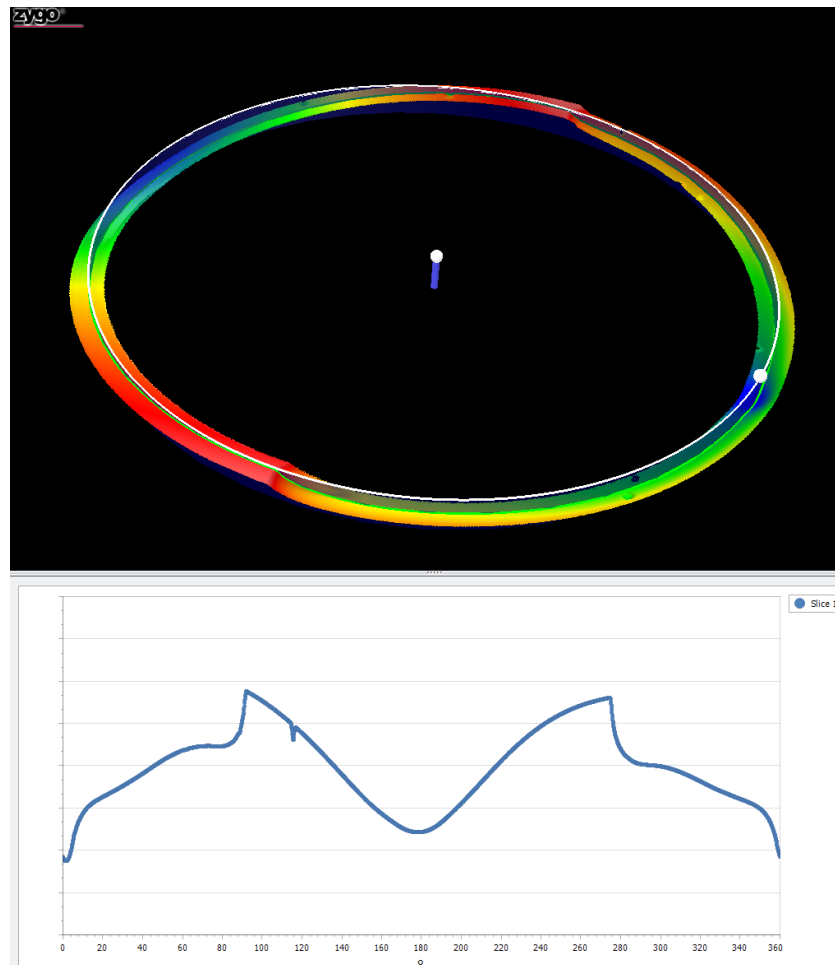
Measured shape of the tilt control interlock feature of a microlens element, illustrating a step defect that would impact the proper alignment of the lens assembly.
